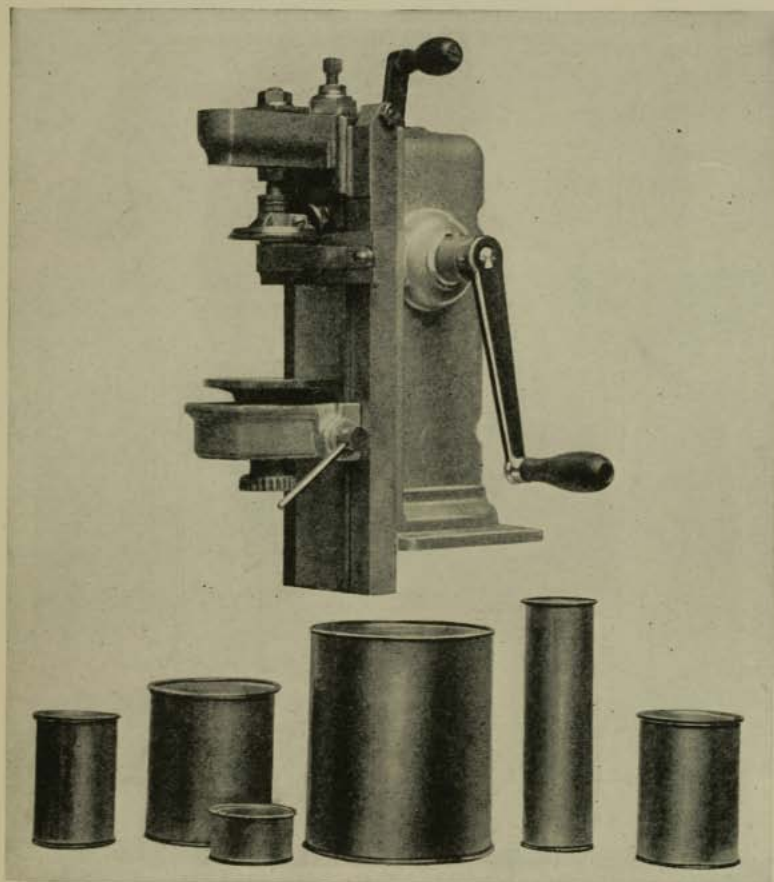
Hand machine for sealing special sanitary cans. (Courtesy of Bowers Can Seal Company, Boston, Mass.)
